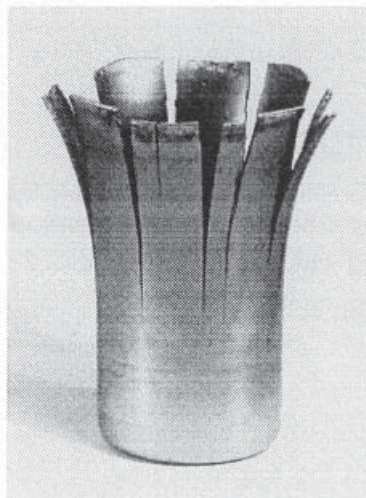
Example of cup made from stainless steel where the formation of cracks is due to severe residual stresses. The cup is formed in a two stage deep drawing process.
